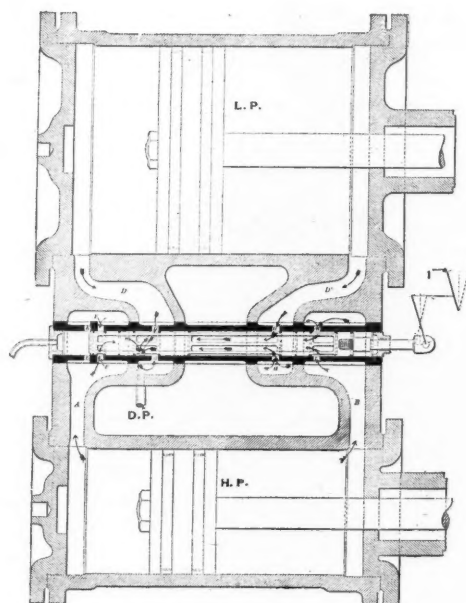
Starting Valve Open; Cylinder Cocks Open.
